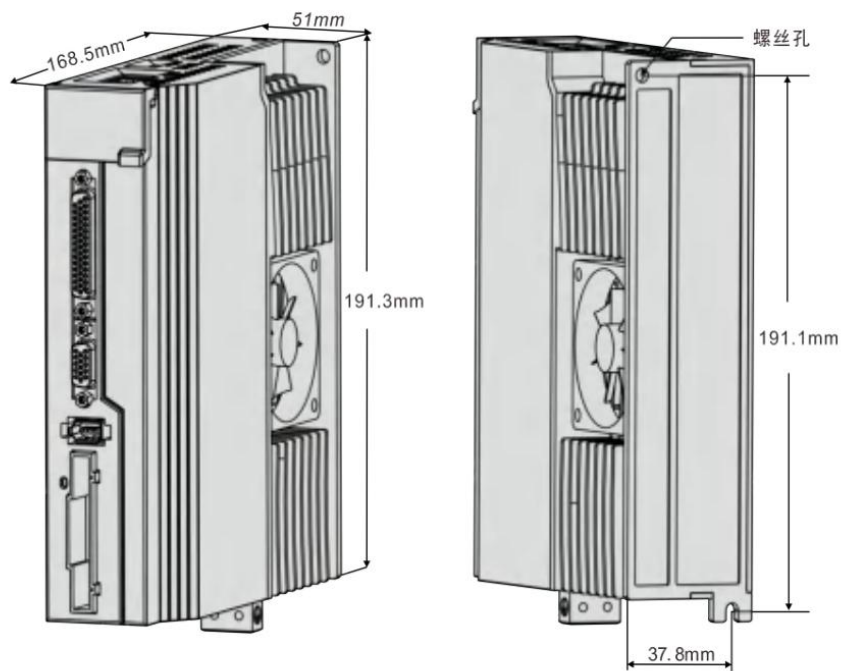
Outline Dimensional Drawing of Q500 Series
